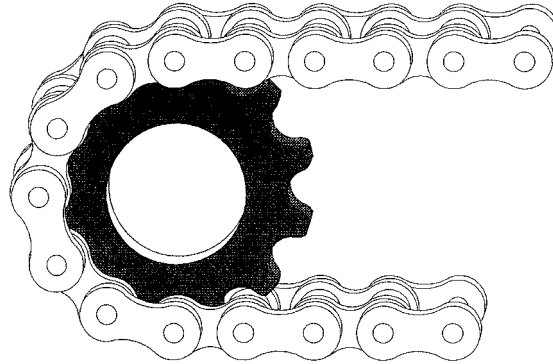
Typical roller chain on sprocket. (*Diamond Chain Company.*)
